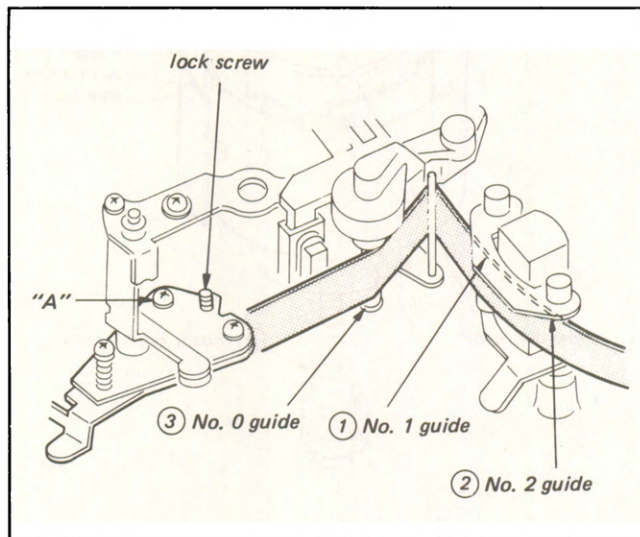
Replacement and adjustment (2) of tension regulator arm plate assembly
